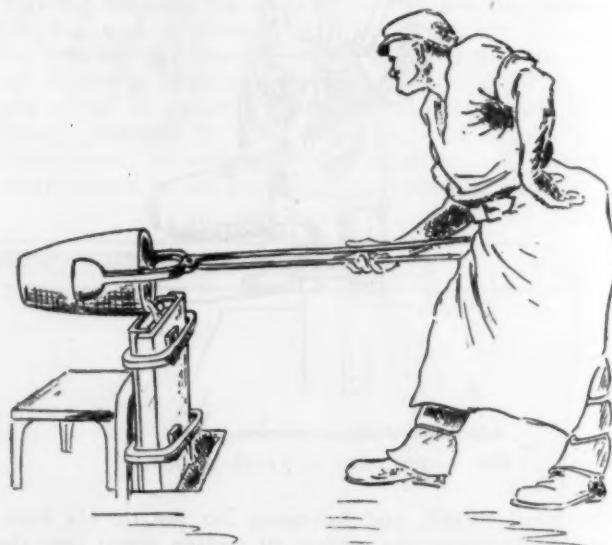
PROPER ANGLE FOR MOLD WITH "DOZZLE" IN PLACE.
